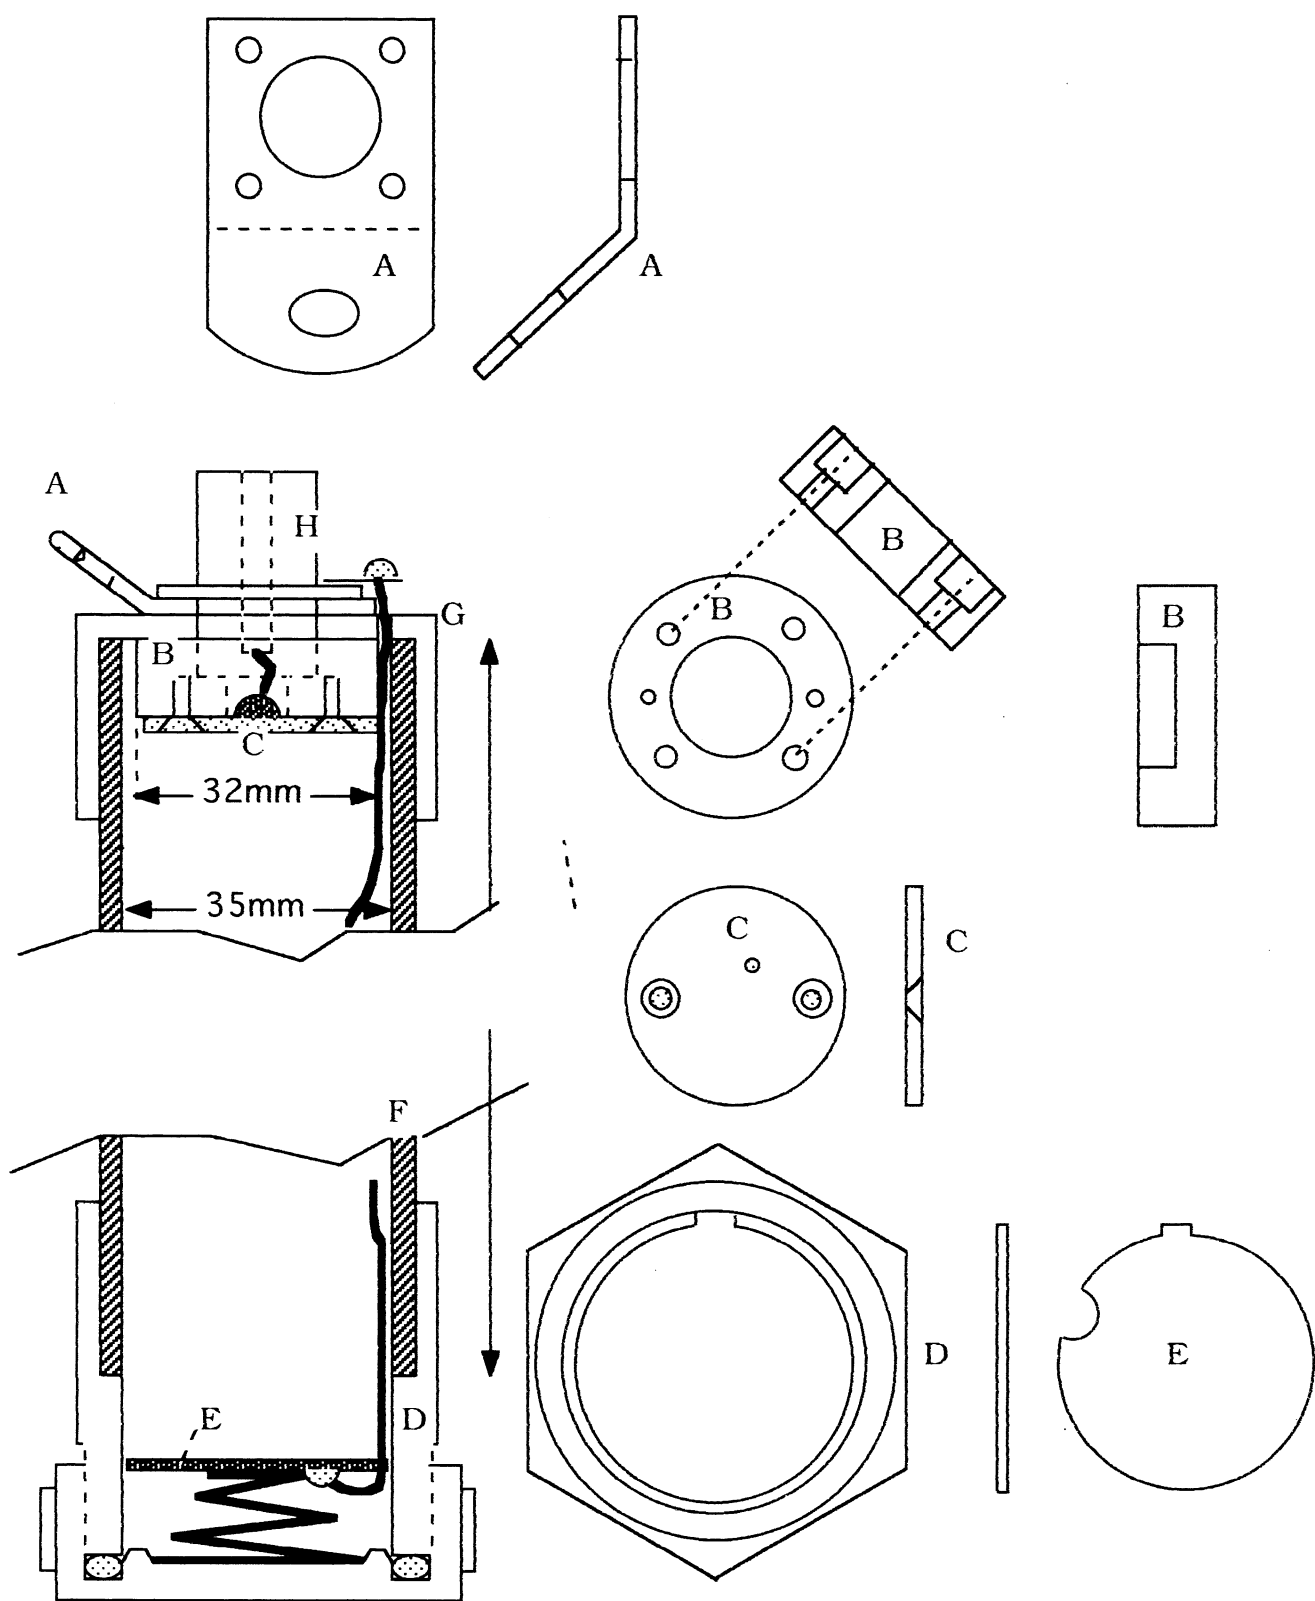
Sewer Light type battery holder. A is the lug to secure holder to a belt, B is made of PVC or wood, C is a brass disc 1.6mm thick, D is the screwed base fitting, E is a keyed disc of 1.6mm. brass, F is PVC 40 mm. tube, G is the cap fitting, H is a UHF co-axial cable connector. Four 3mm countersunk screws which must not contact C pass through B and secure the co-ax connector.
